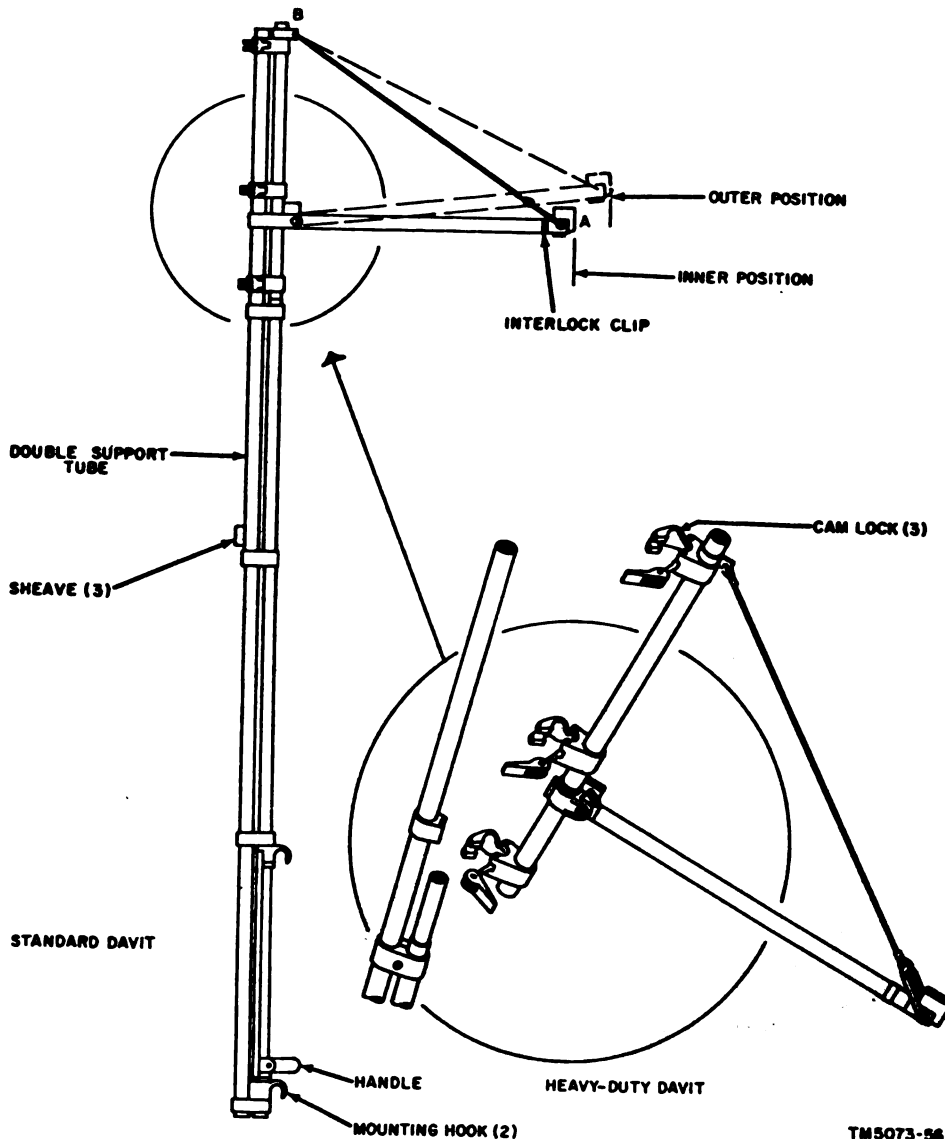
Assembly of Tower Erection Davit MX-1215/U.
